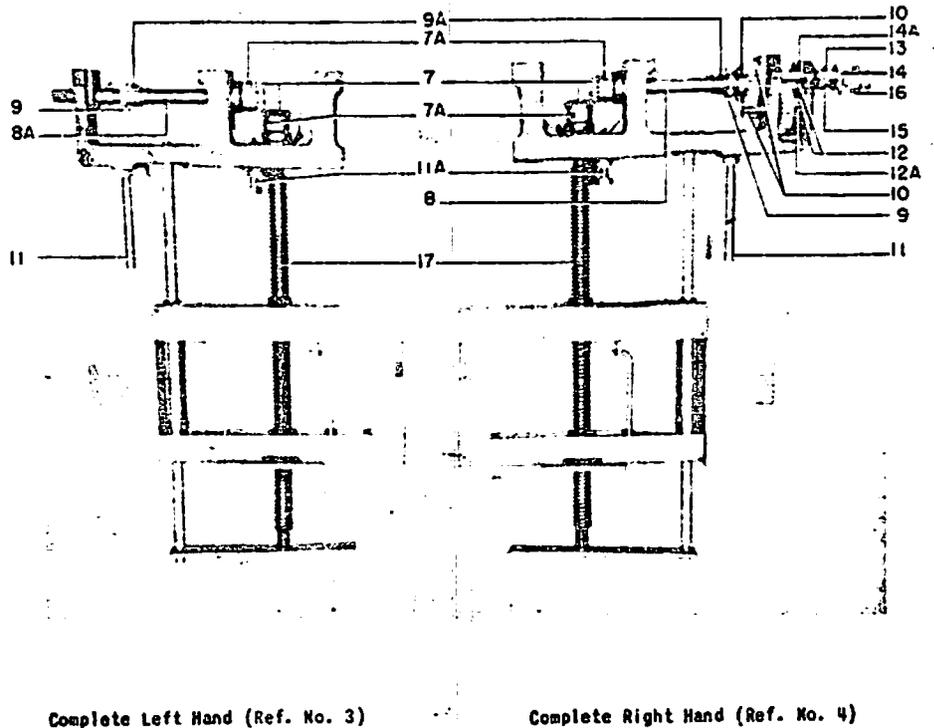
Elevating Mechanism for M-36H Equipments Rated 750 mva, M-26 Equipments Rated 350 mva and M-35 Equipments Rated 2000A
